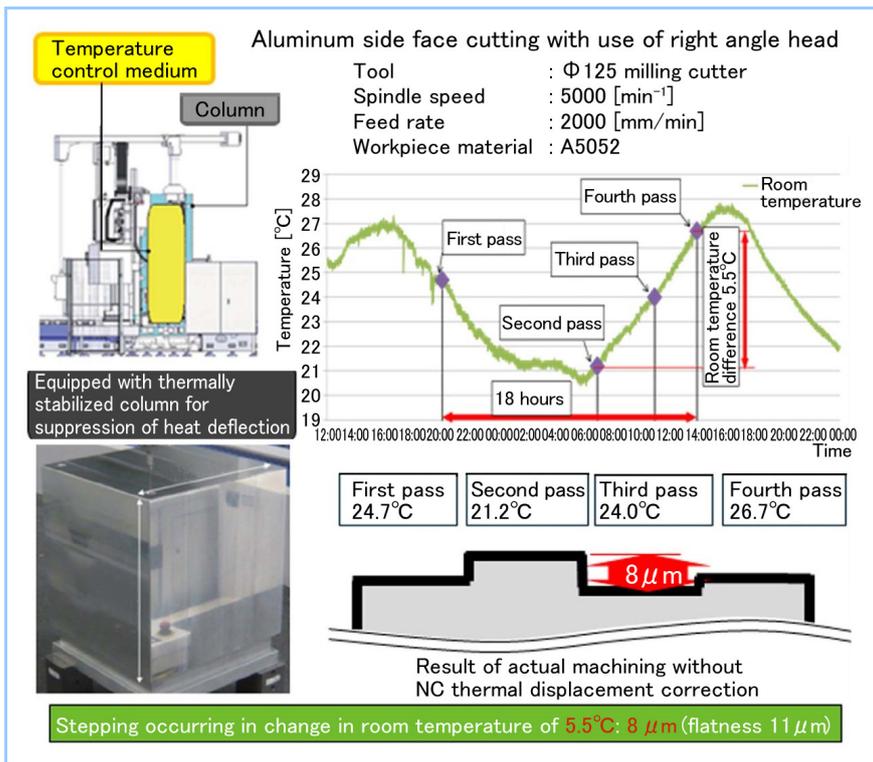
Example of high-precision cutting (horizontal shaft cutting)
